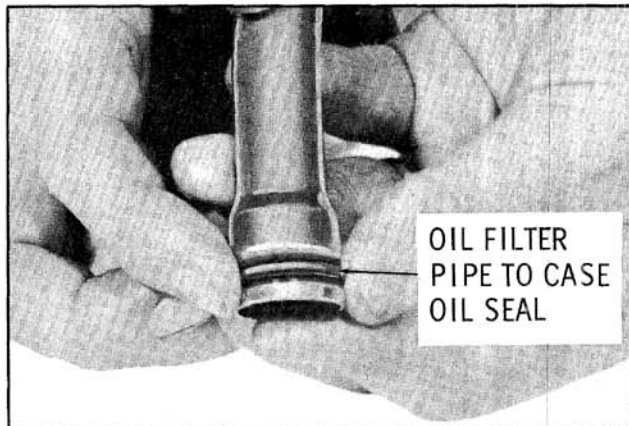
Oil Filter Pipe to Case Oil Seal
